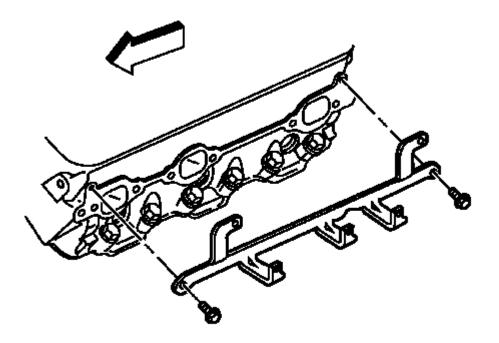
Locating Spark Plug Wire Support Courtesy of GENERAL MOTORS CORP.
